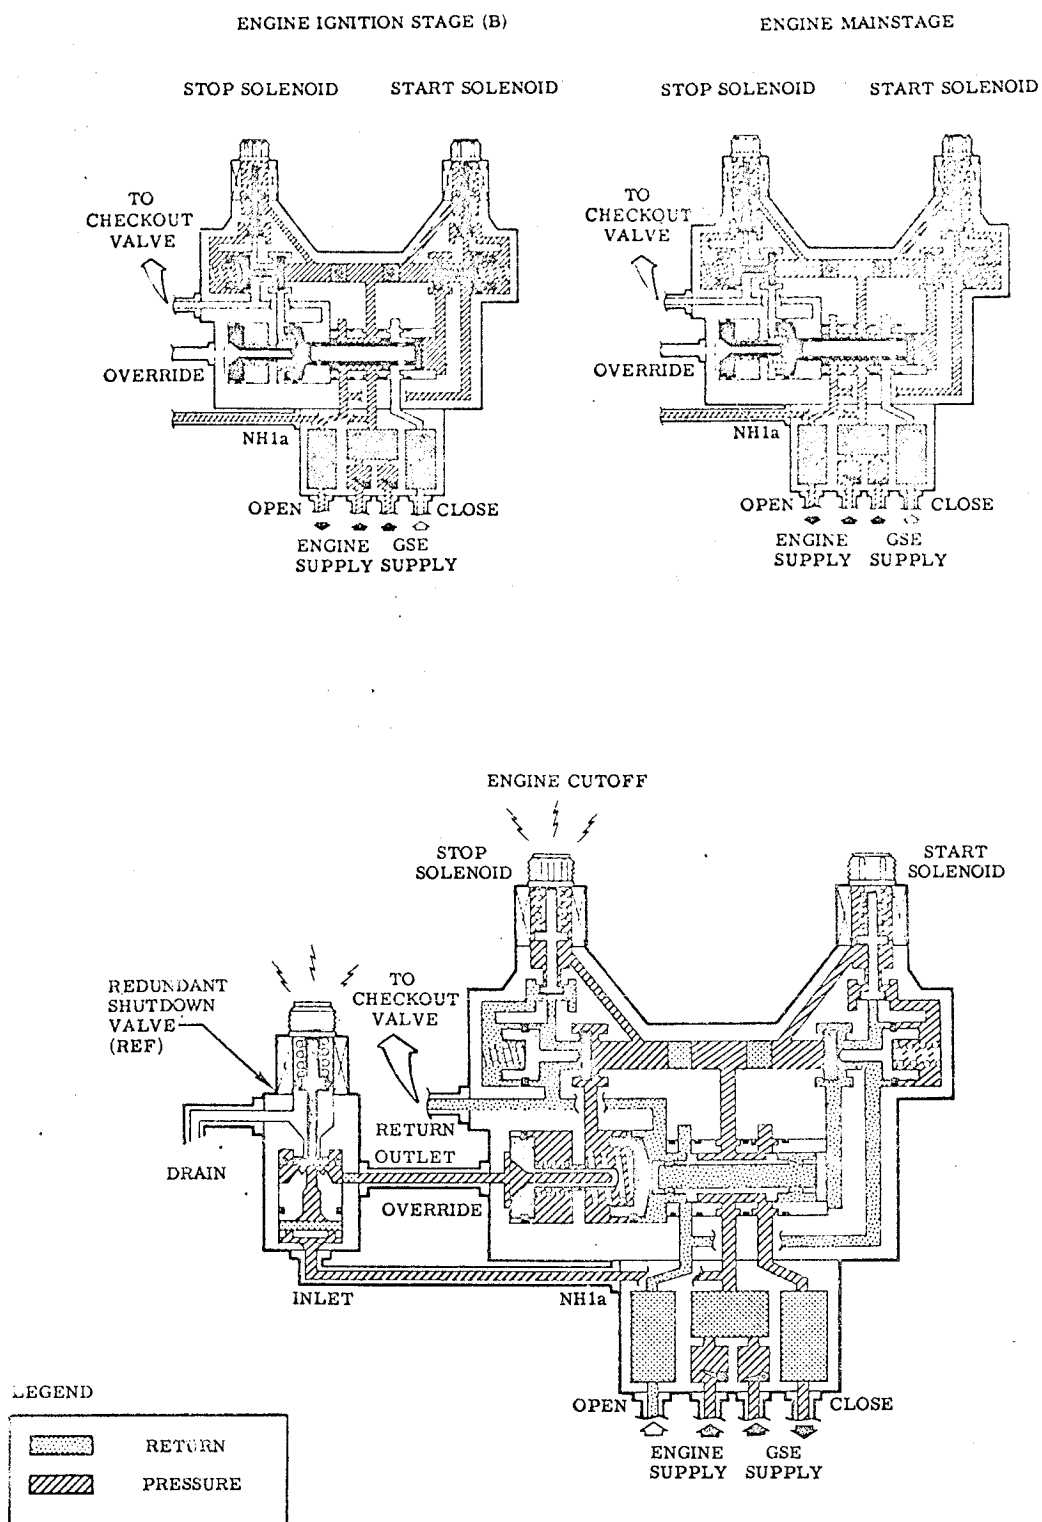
Engine Control Valve and Redundant Shutdown Valve Schematic (Sheet 1 of 2)
